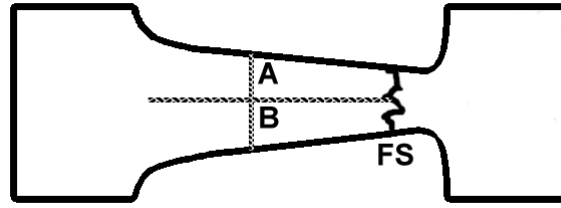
Cutting of fractured tensile samples where A and B mark the different parts and FS is the fracture surface
